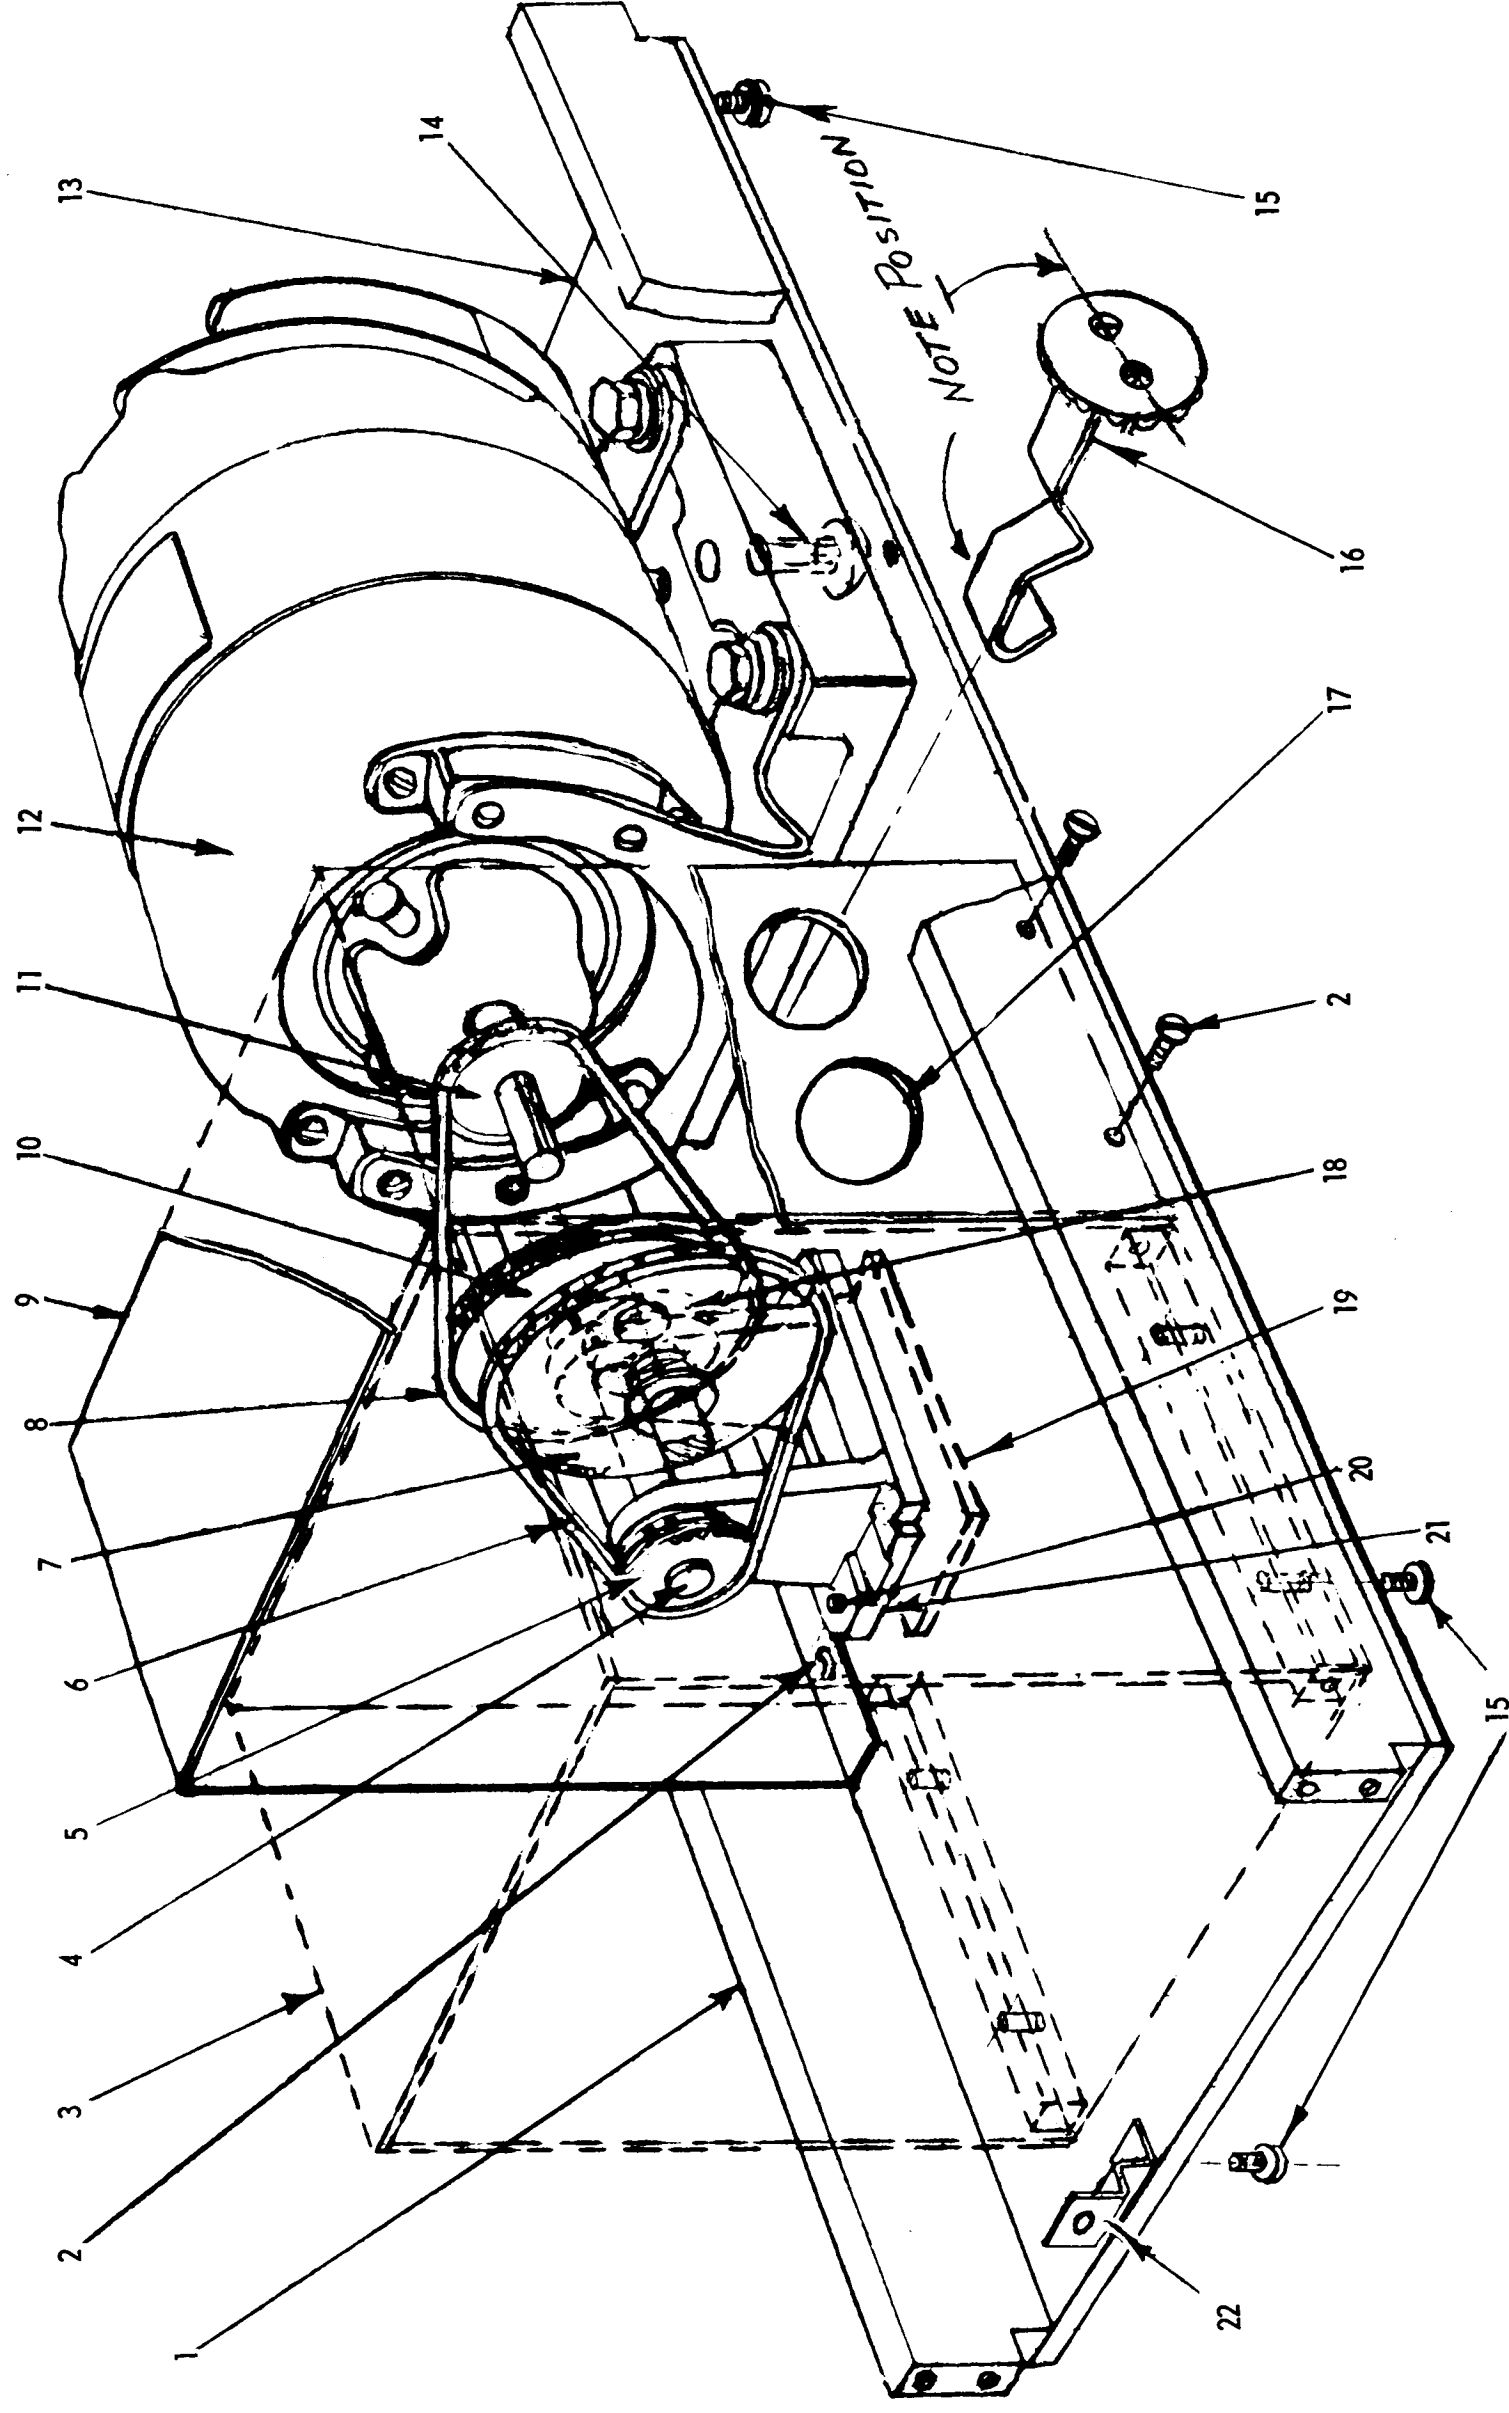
MOTOR AND GEAR BOX ASSEMBLY 358-100-C21 60 CYCLE
